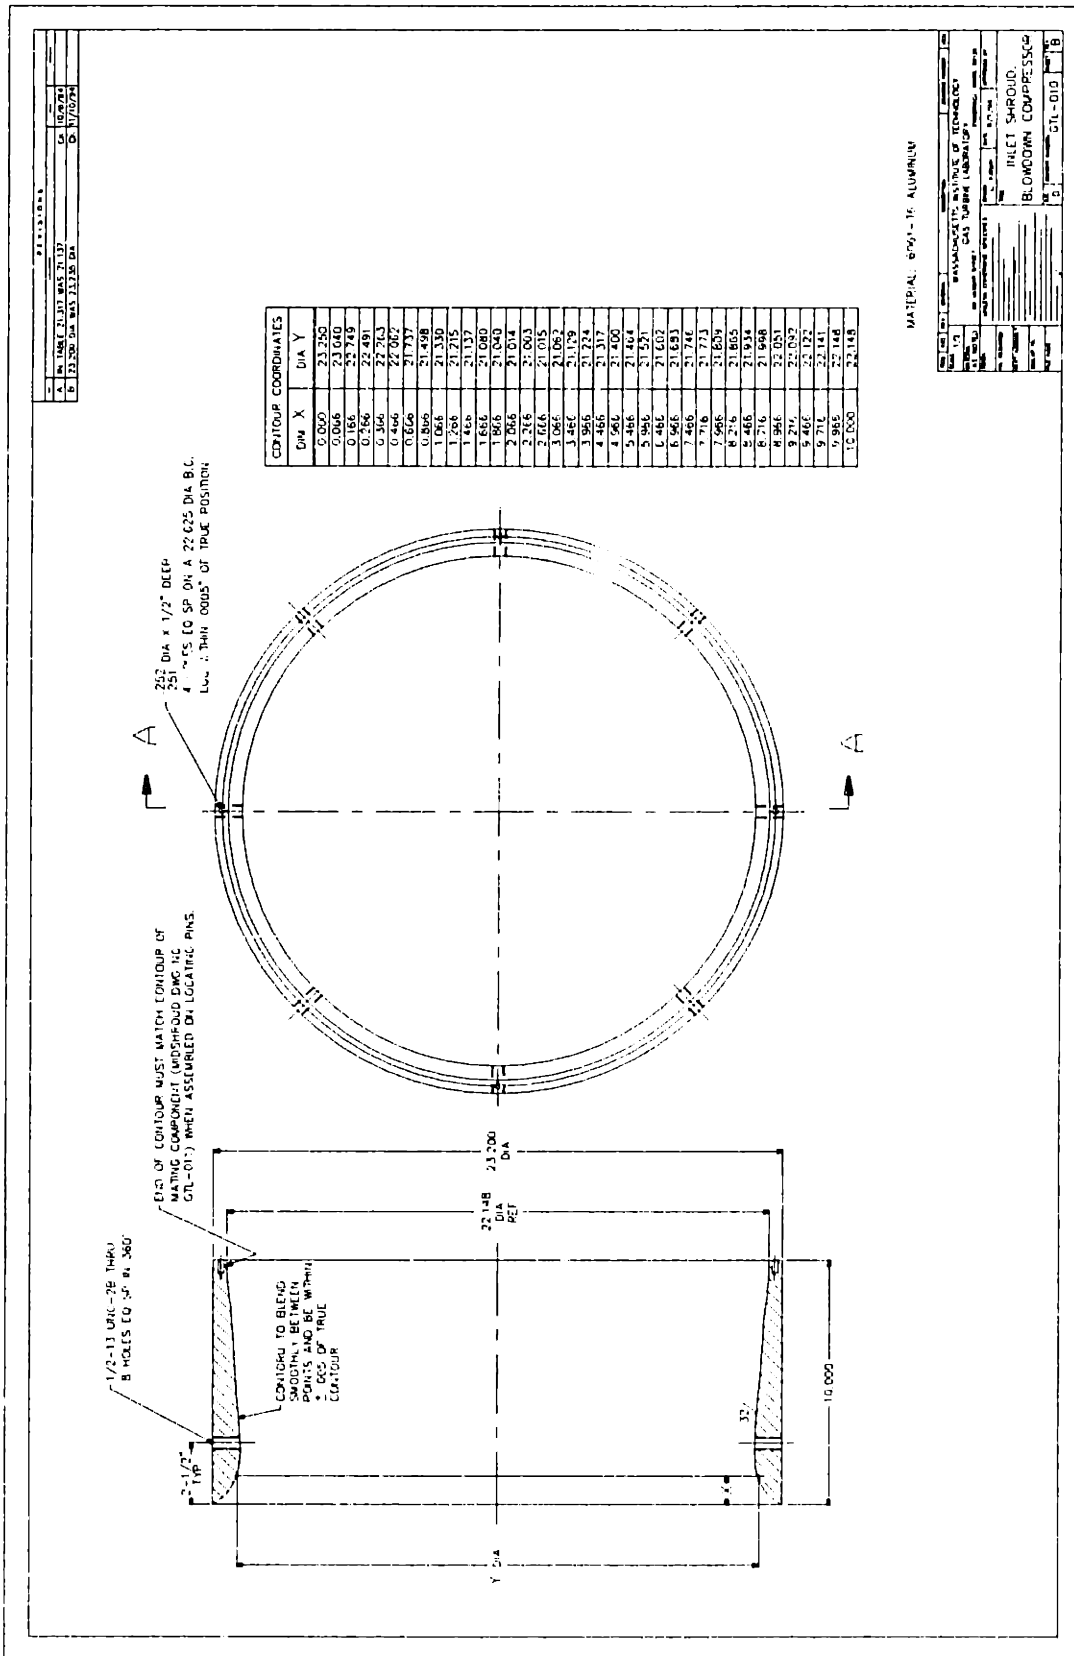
Fan stage drawing (GTL-010): inlet shroud section
